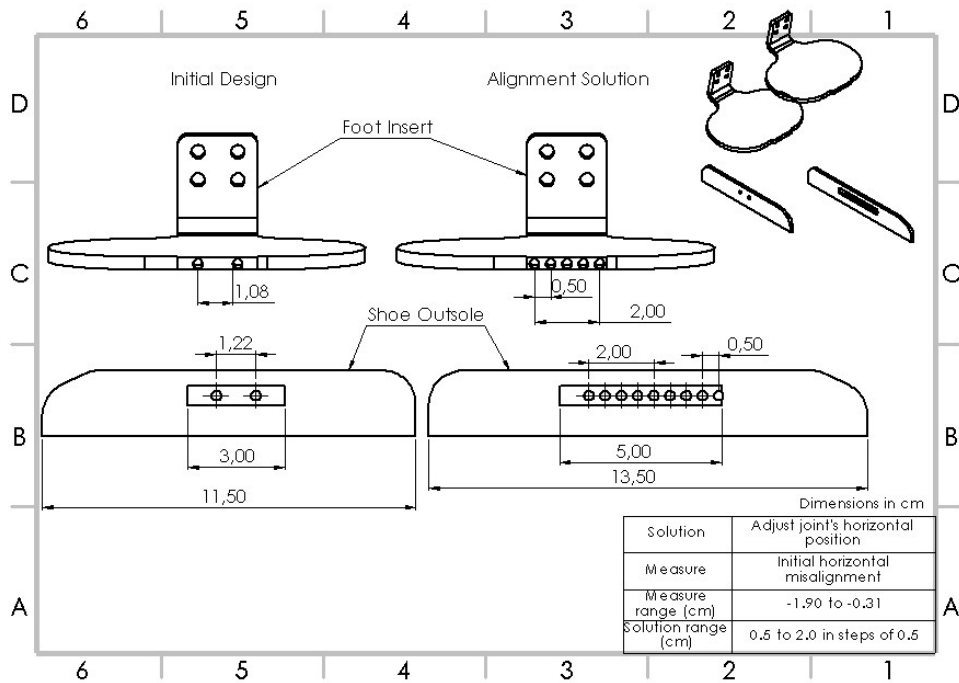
Technical drawing of the initial and final designs for the horizontal alignment solution.
